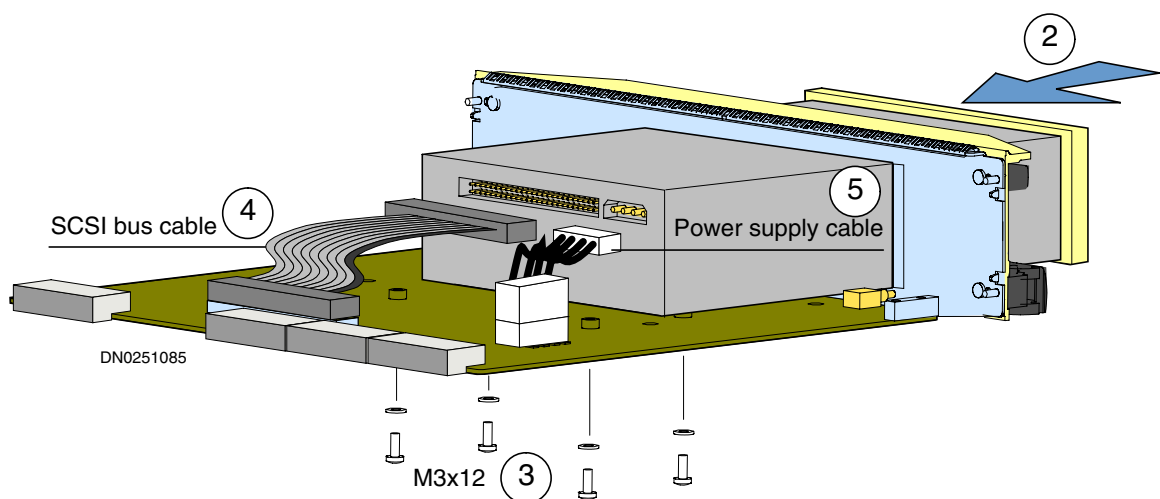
Installing the FDU (Magneto Optical Disk Drive and ODPU-A)
